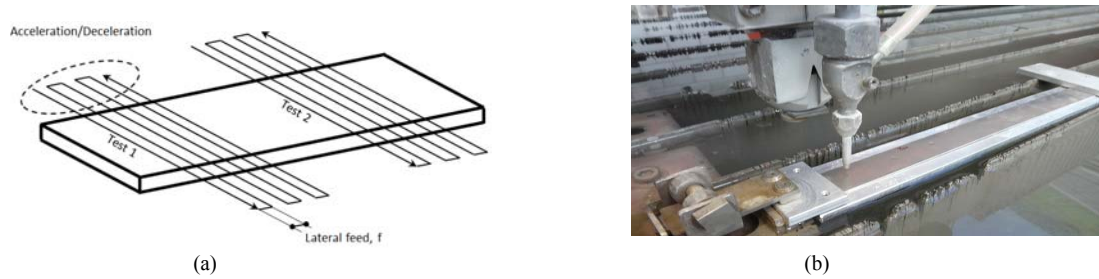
(a) Milling tool paths; (b) Experimental set-up;
